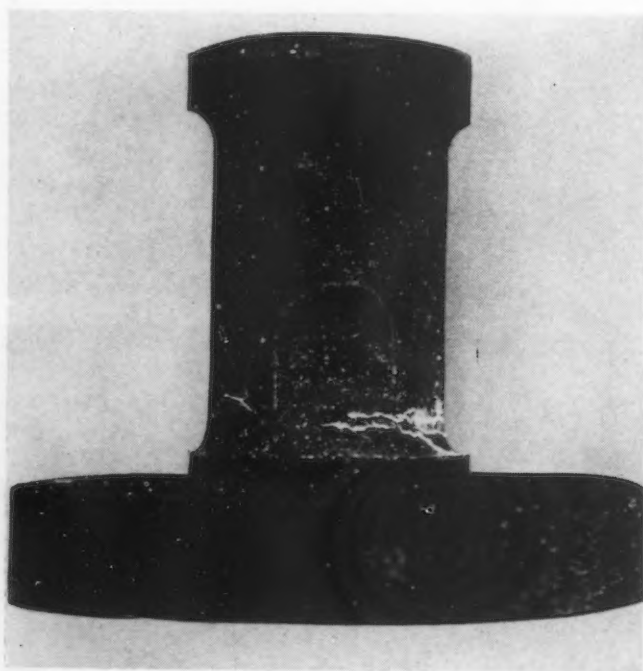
Shrinkage cracks and scattered pinhole porosity in a permanent mold aluminum casting. The photo to the right shows the casting as it appears under ordinary white light.
